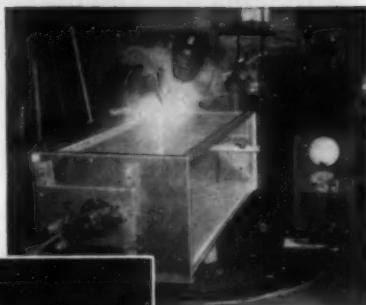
Improves Quality by producing solid, smooth welds with minimum discoloration to parent metal. Photo shows bead as welded.
